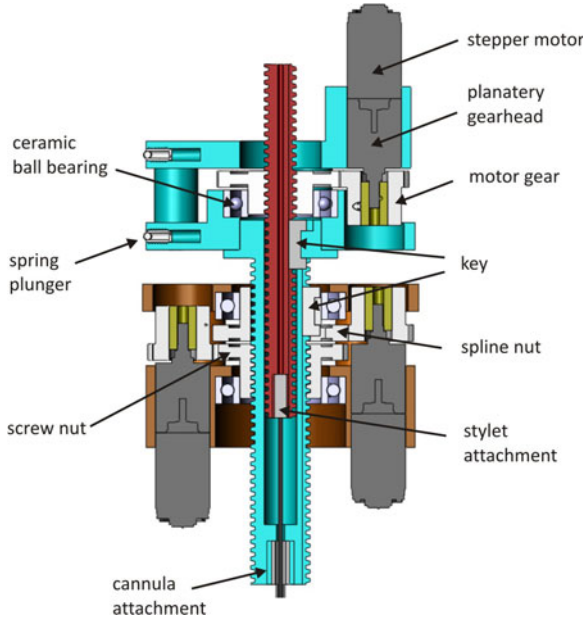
Sectional view of the drive mechanism. A spline nut and screw nut engage the spline and threads of the screw-spline, respectively. Another threaded nut engages the screw that rides inside the screw-spline.
